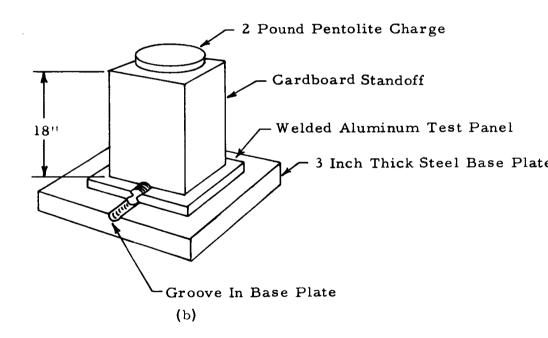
EXPLOSIVE IMPACT LOADING OF BUTT-WELDED TEST PANELS
